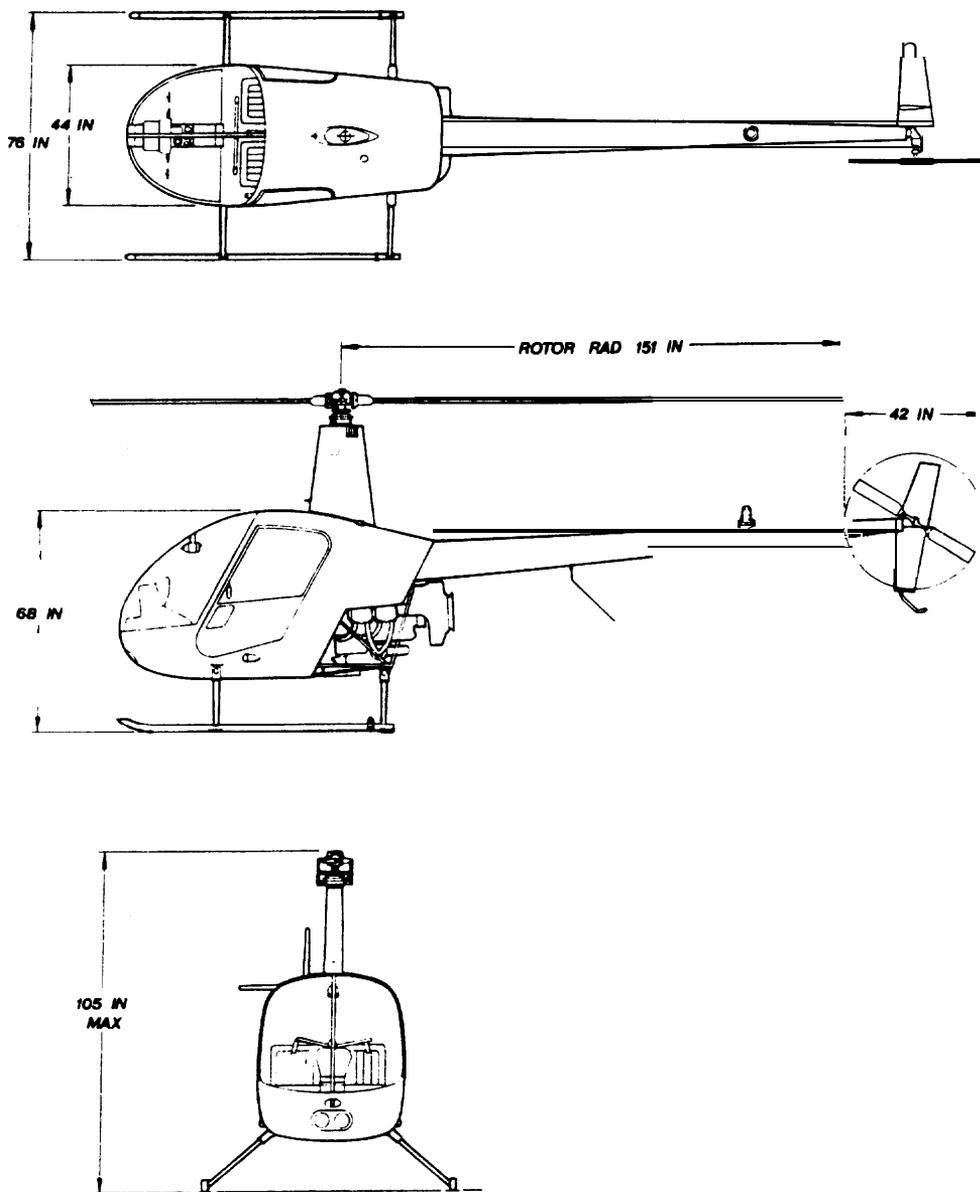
Three-Dimensional View of Robinson Helicopter Company
